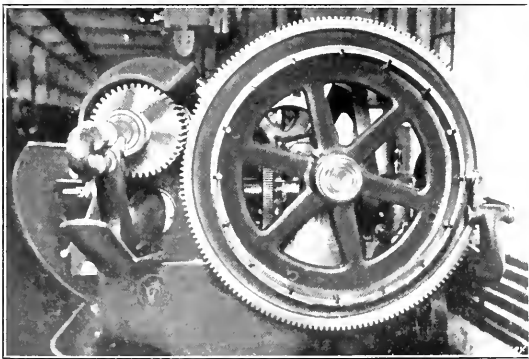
End View of Cleveland Automatic, showing Regulating Drum and Auxiliary Mechanism
